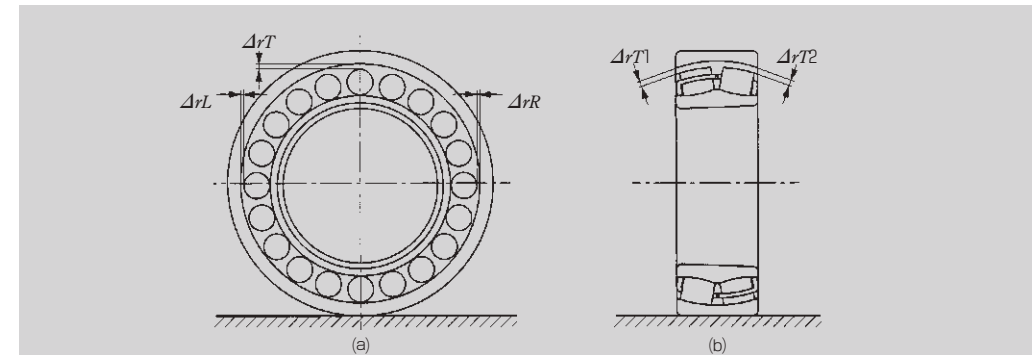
Clearance Measurement Points (Bearing Outside Diameter: Larger Than 200 mm)
